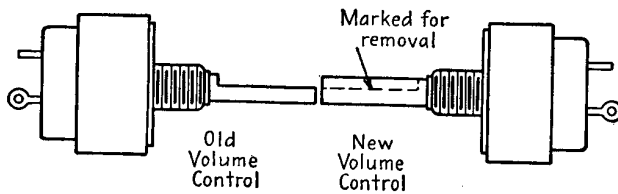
Marking the volume-control shaft for a push-on knob.
